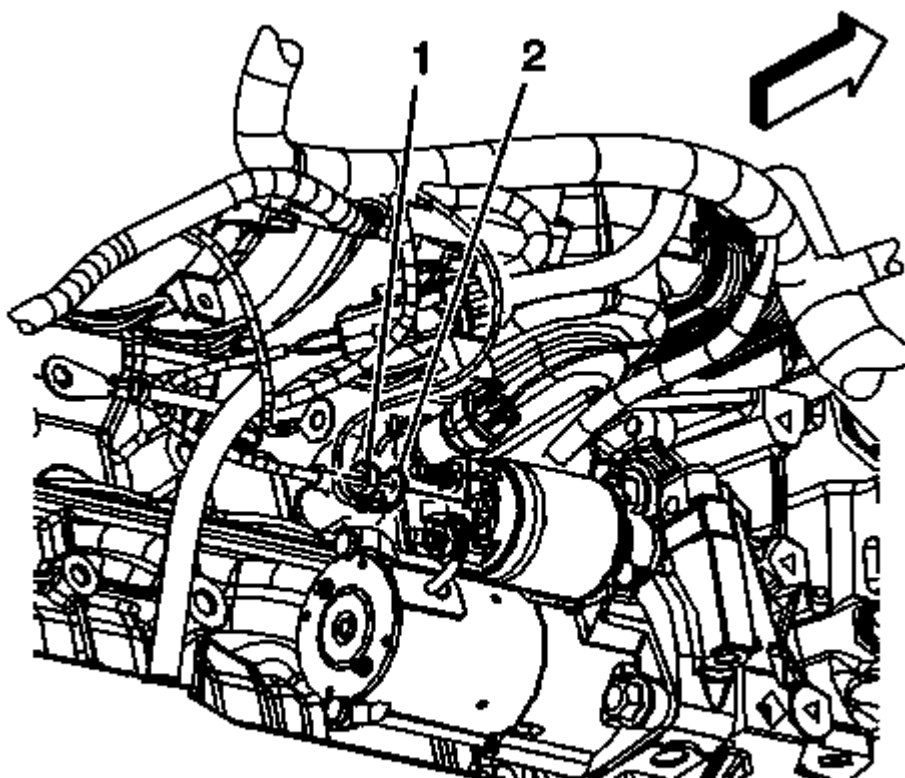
Identifying Starter Solenoid Engine Harness & Nut
